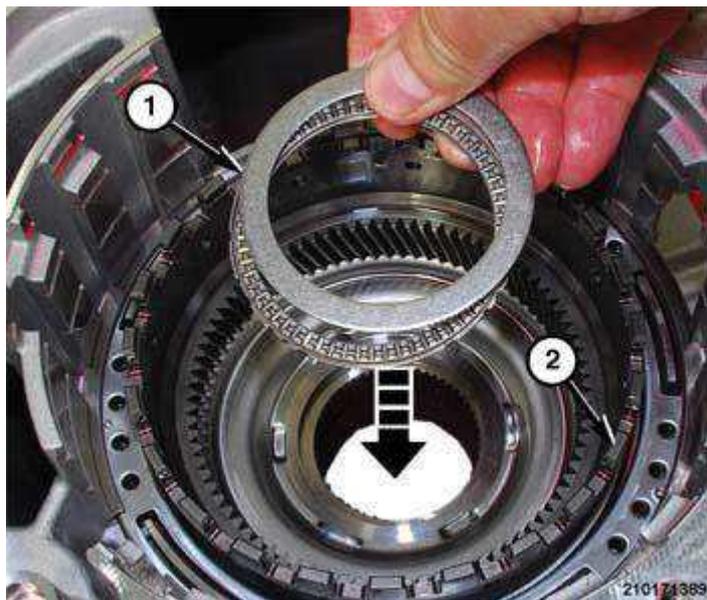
Front Annulus Gear Thrust Bearing And Race
